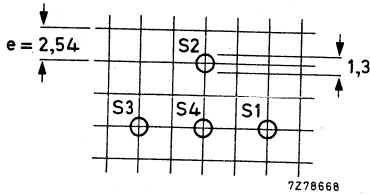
Hole pattern for mounting on a printed-wiring board (solder side).
